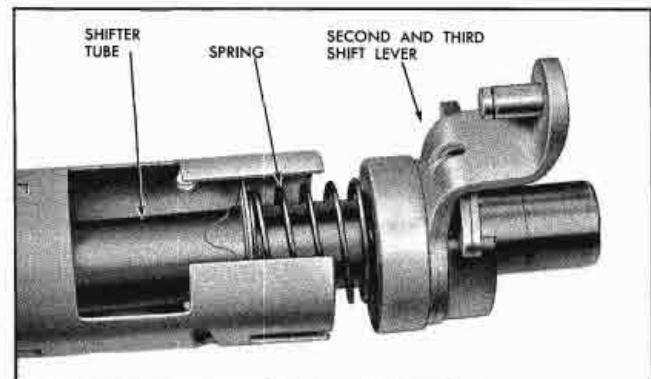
2nd and 3rd Shift Lever Assembly
